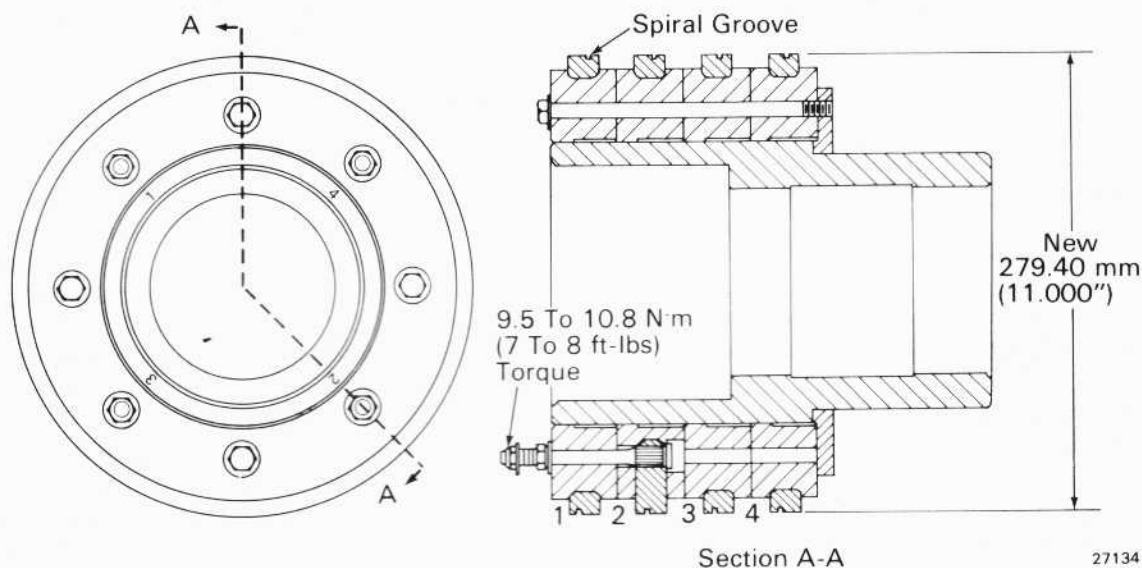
AC Generator Collector Ring Assembly, Cross-Section
